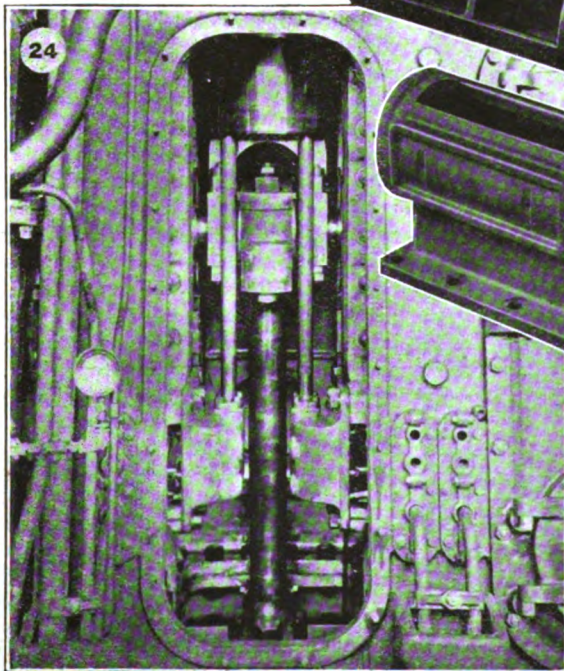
Air compressor piston and connecting rod—Fig. 21—Crankshaft assembled in bed plate—Fig. 22—Bottom view of crankcase—Fig. 23—Rotary air-admission valve—Fig. 24—Rear view of connecting rod assembly—Fig. 25—Scavenger pump pistons and rod and end view of crankcase and bed plate assembly.
